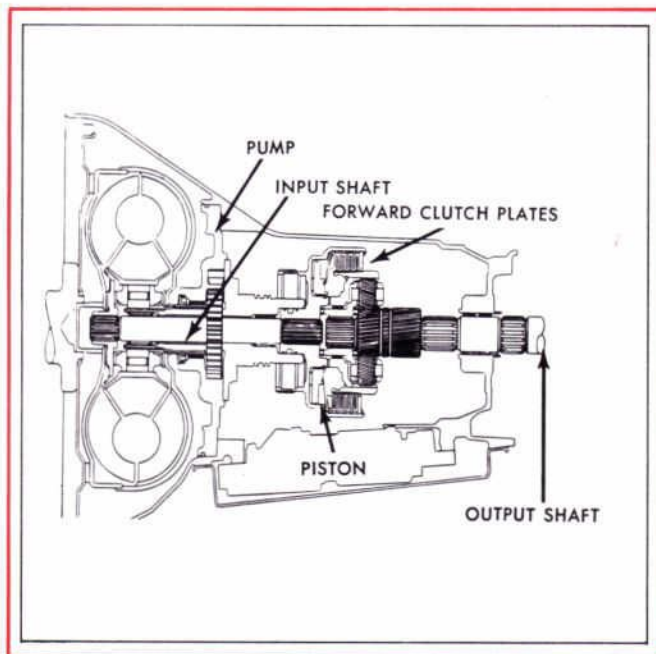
Pump Operation Necessary to Couple Input and Output Shafts Together
